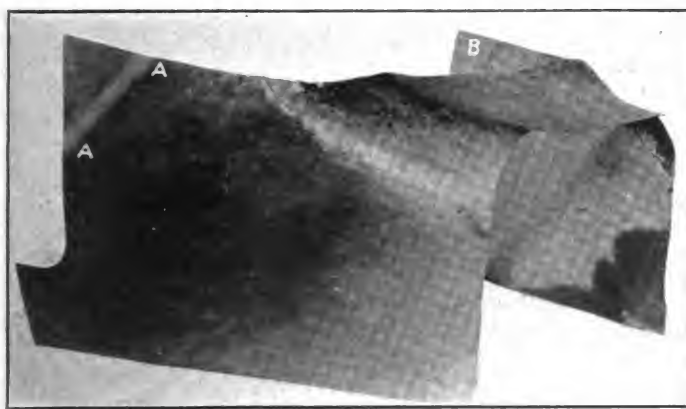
Small pieces welded to corners of fowl at A and B in five minutes, and effecting considerable saving in material
